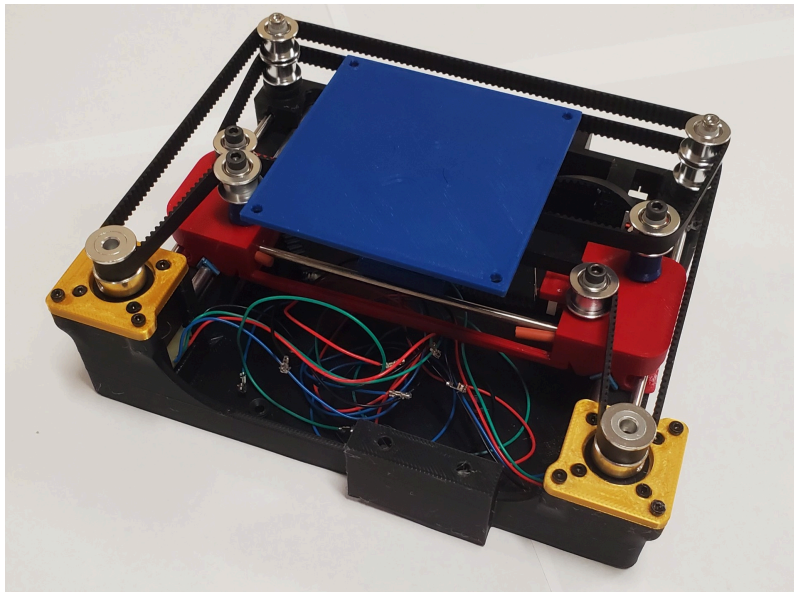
Full Assembly of the V-Groove Printer for X and Y-Axis Motion
